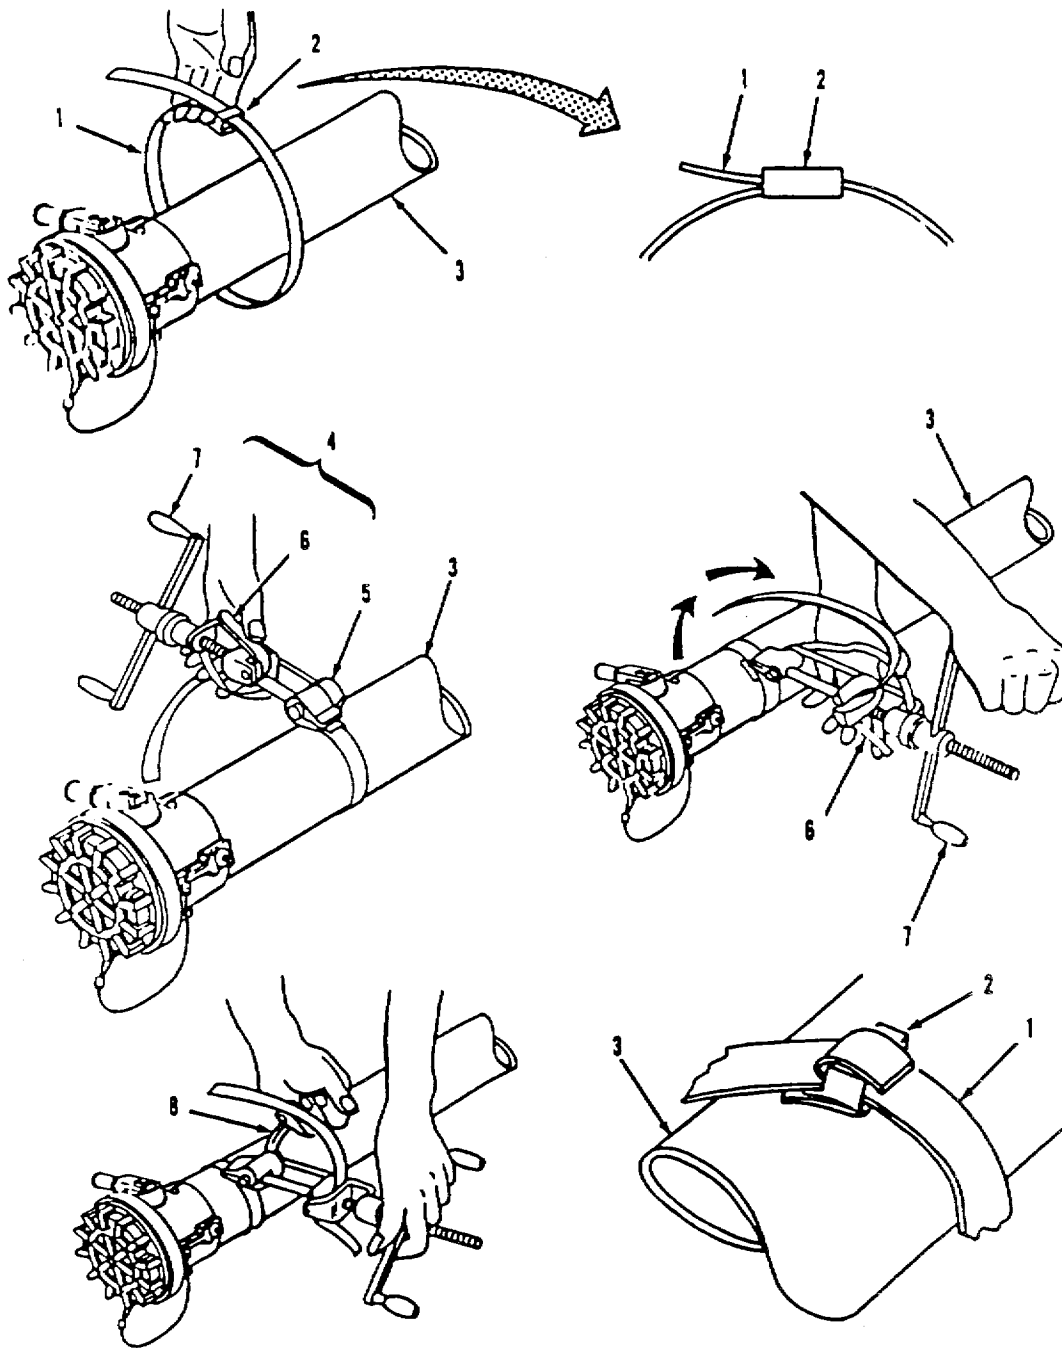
3-Inch Fuel Hose Clamp Installation.
